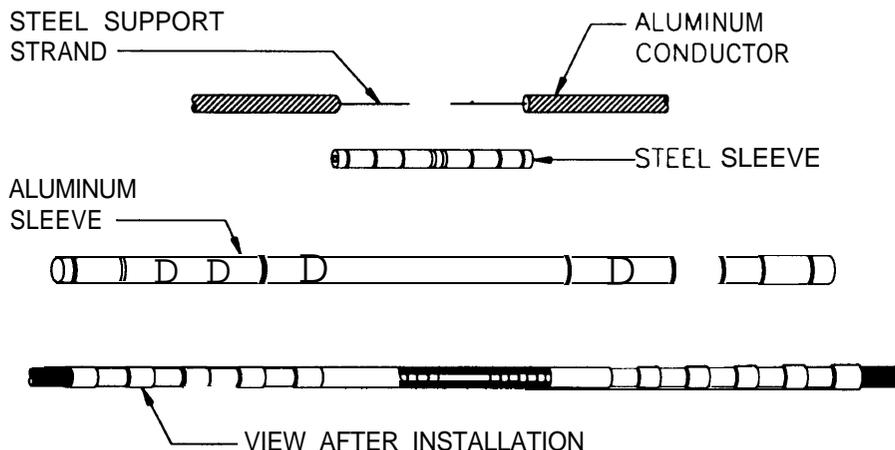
Double-sleeve compression splice (Courtesy of BURNDY Electrical)
